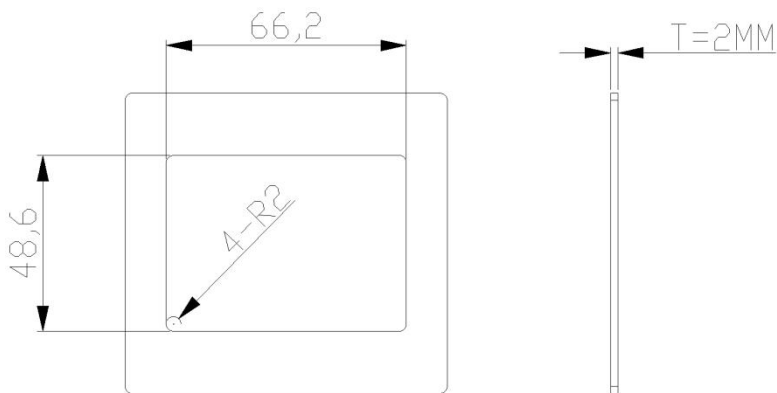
Dimensions of an external opening hole for a keypad of 22kW below (unit: mm)
